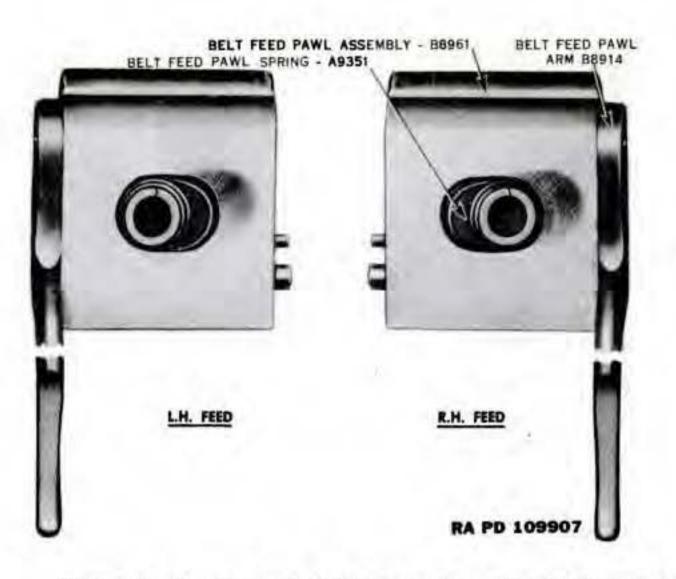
Position of belt feed pawl spring for left-hand and right-hand feed.
